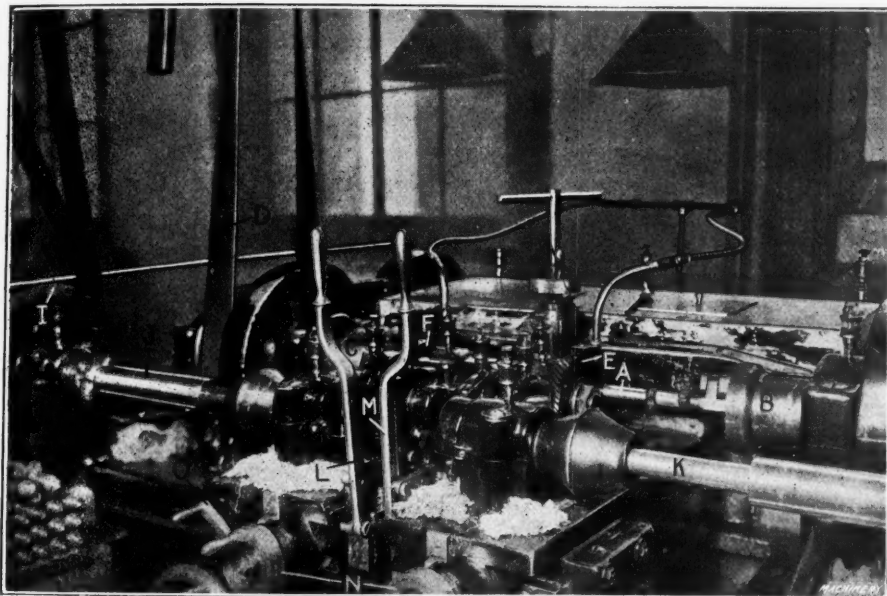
Machine used for milling Cams, Two Cams being machined at one Setting of the Cutters
